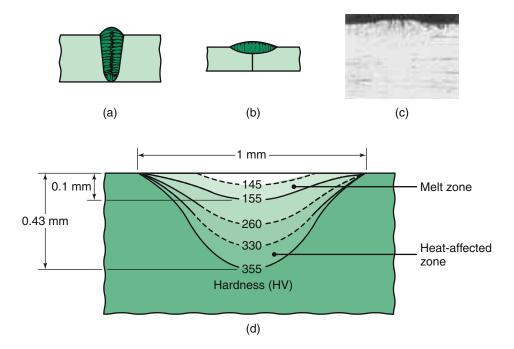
Grain structure in (a) a deep weld and (b) a shallow weld. Note that the grains in the solidified weld metal are perpendicular to their interface with the base metal. (c) Weld bead on a cold-rolled nickel strip produced by a laser beam. (d) Microhardness (HV) profile across a weld bead.
